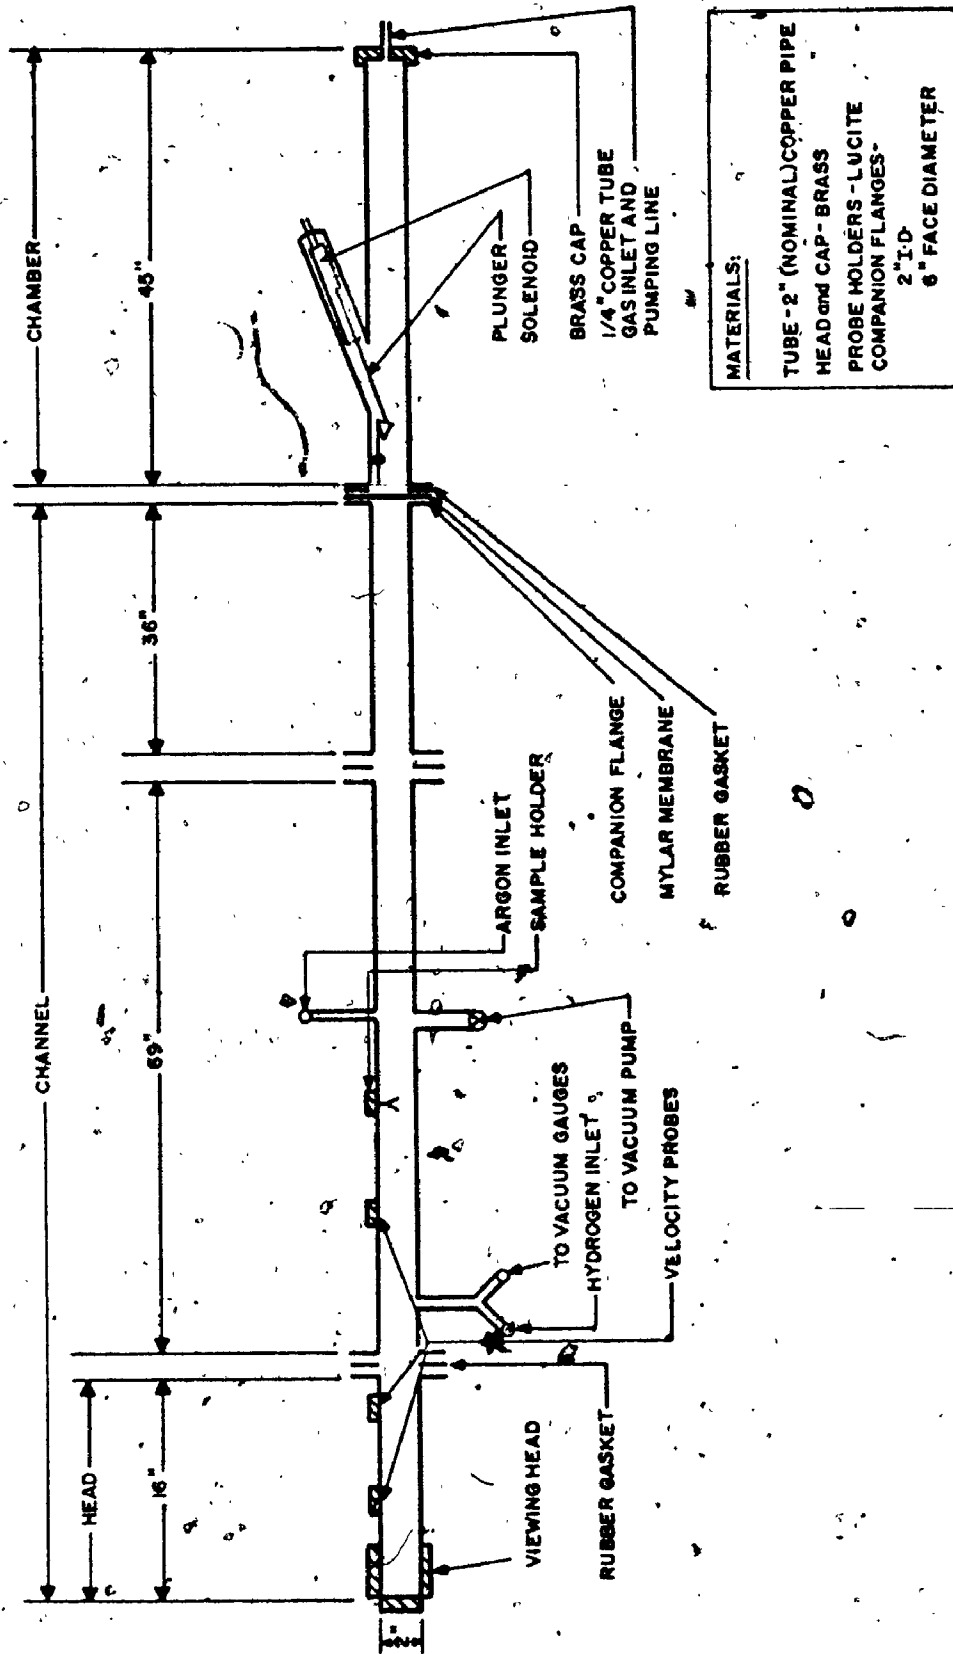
Diagram of Assembled 2" Copper Shocktube Indicating Dimensions
